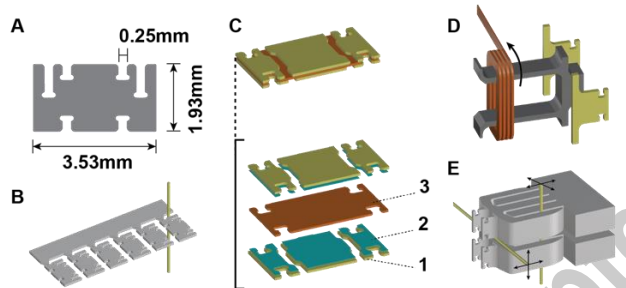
Part production techniques used in prototyping. Dimensioned node part (A) is cut with wire-EDM (B). Parts with flexural hinges (C) are fabricated by laminating layers of brass (1), B-staged adhesive (2), and Kapton (3). Coil parts are made by winding wire around a mandrel (D). Magnetic cores are made with two orthogonal wire-EDM cuts (E).
